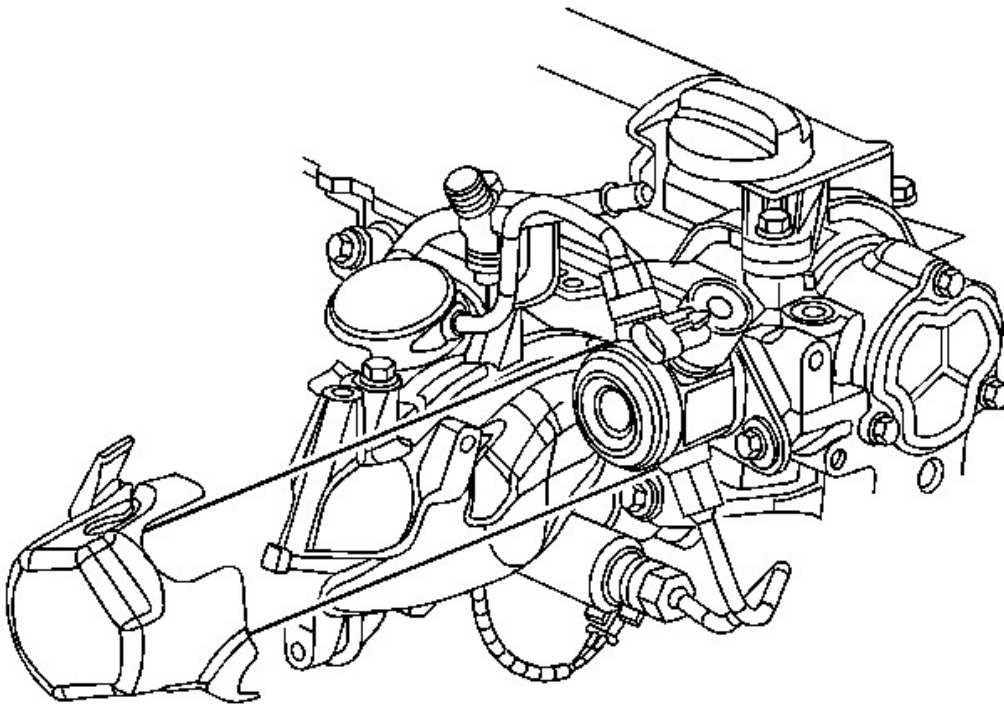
Identifying High Pressure Fuel Pump Insulator
